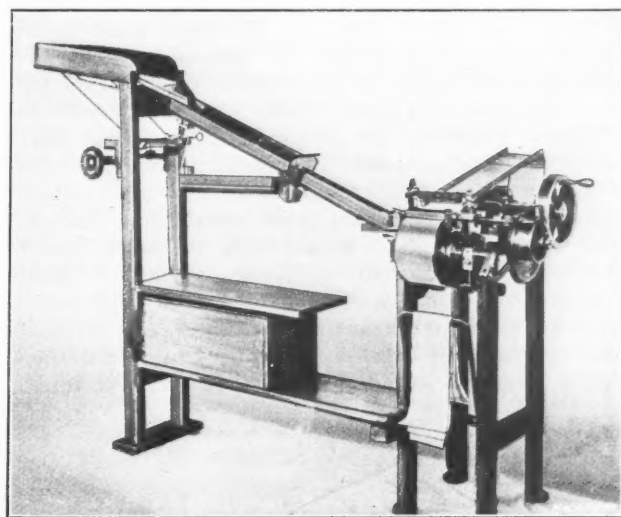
Pin-sticking Machine which counts the Pins and sticks them into Papers
